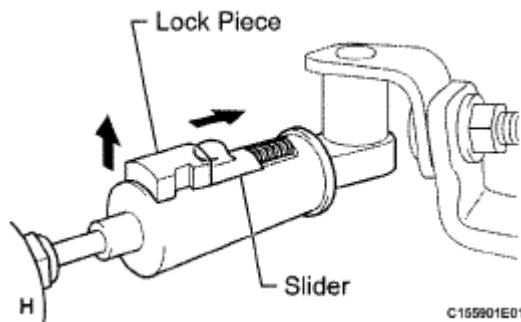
Pressing Lock Piece From Back Side To Release Lock
